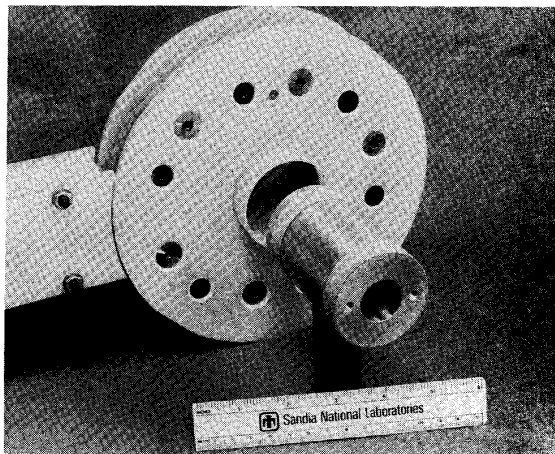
Single coil assembly with section of flyway tube and projectile.
